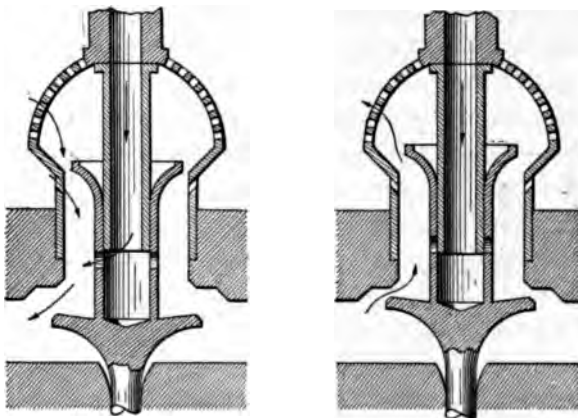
Farcot Combined Valves, Inlet and Exhaust Positions
